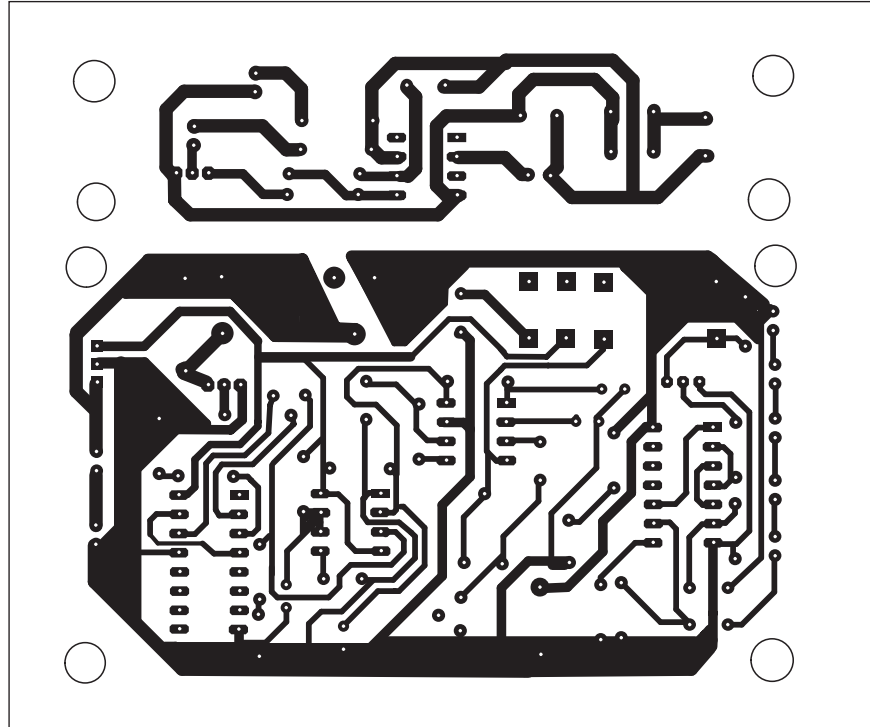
Actual-size, single-side PCB layout for the car security system with remote control
